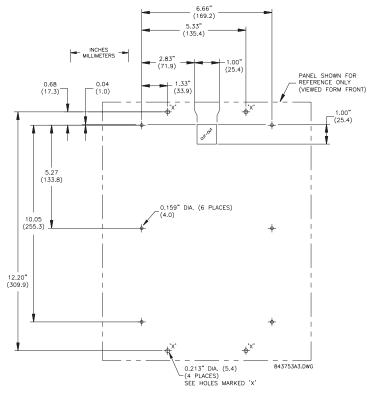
UR VERTICAL SIDE MOUNTING REAR DIMENSIONS
